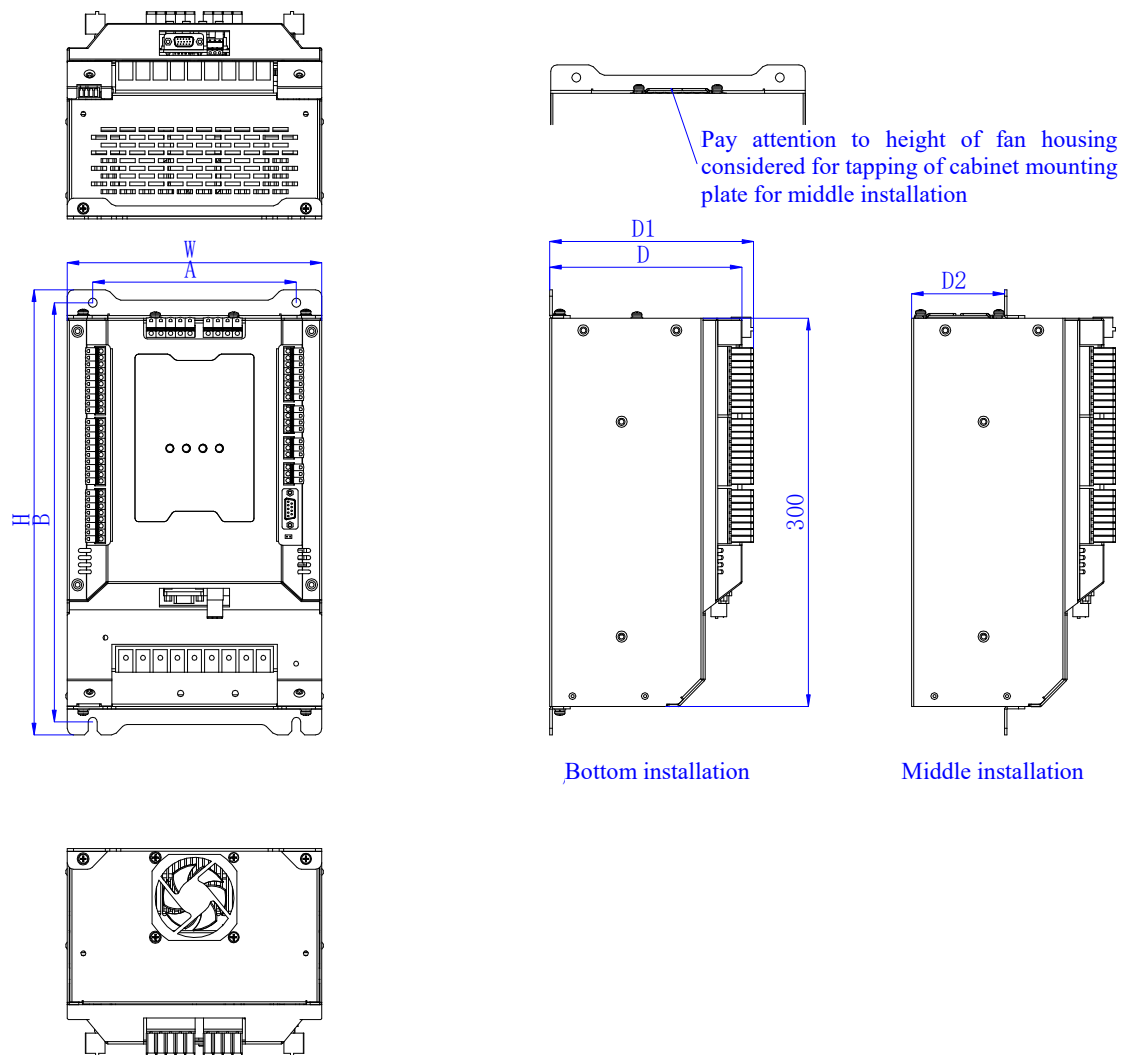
Schematic for installation dimensions of AS380S elevator integrated drive controller
